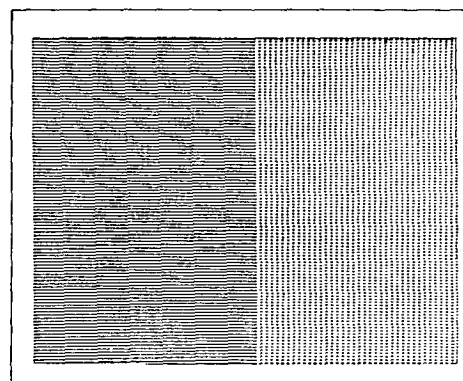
Accuracy of cutting machine: groove pitch and rotation speed.
